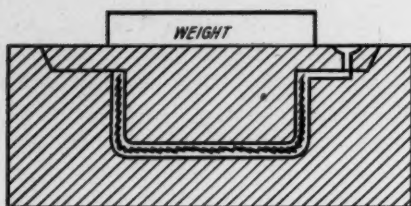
Expensive cope and drag patterns furnished by a customer required machines a jobbing shop did not have, hence had to purchase the castings outside. To utilize its own equipment fully, the jobbing shop redesigned the casting to eliminate the cope, returned the work to its own shop and produced uniform castings at a cost below the price paid for the castings outside.
